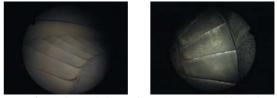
Turbine (left) and compressor (right) wheels - Main Engine – starboard side
